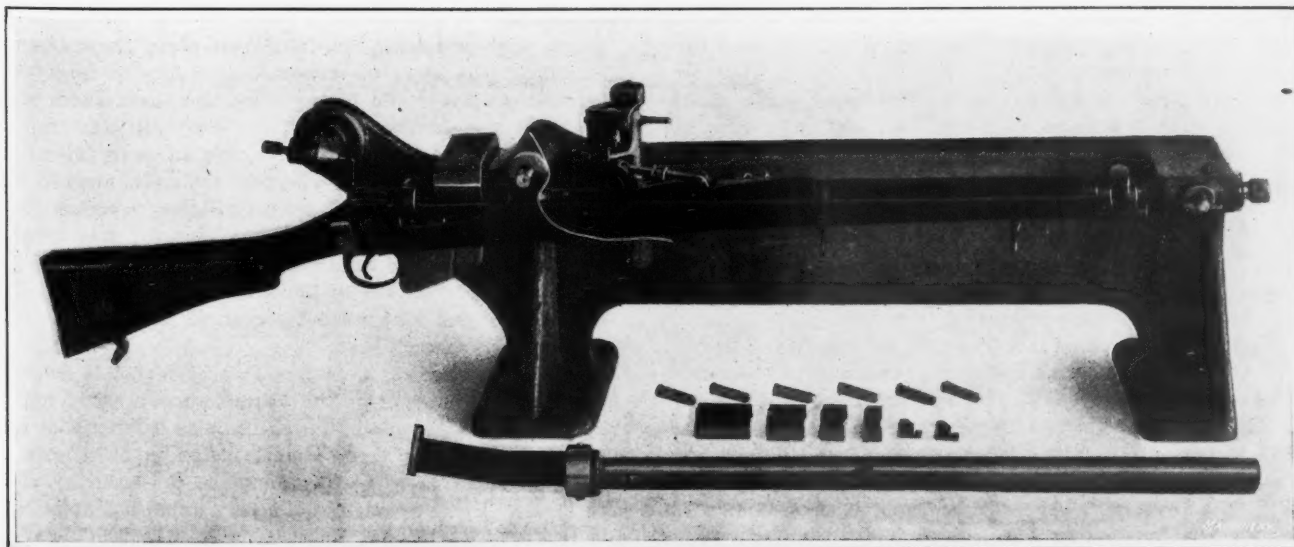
Same Gage as shown in Fig. 6, with Rifle shown in Position in Gage, indicating how Gages of this Type are used
